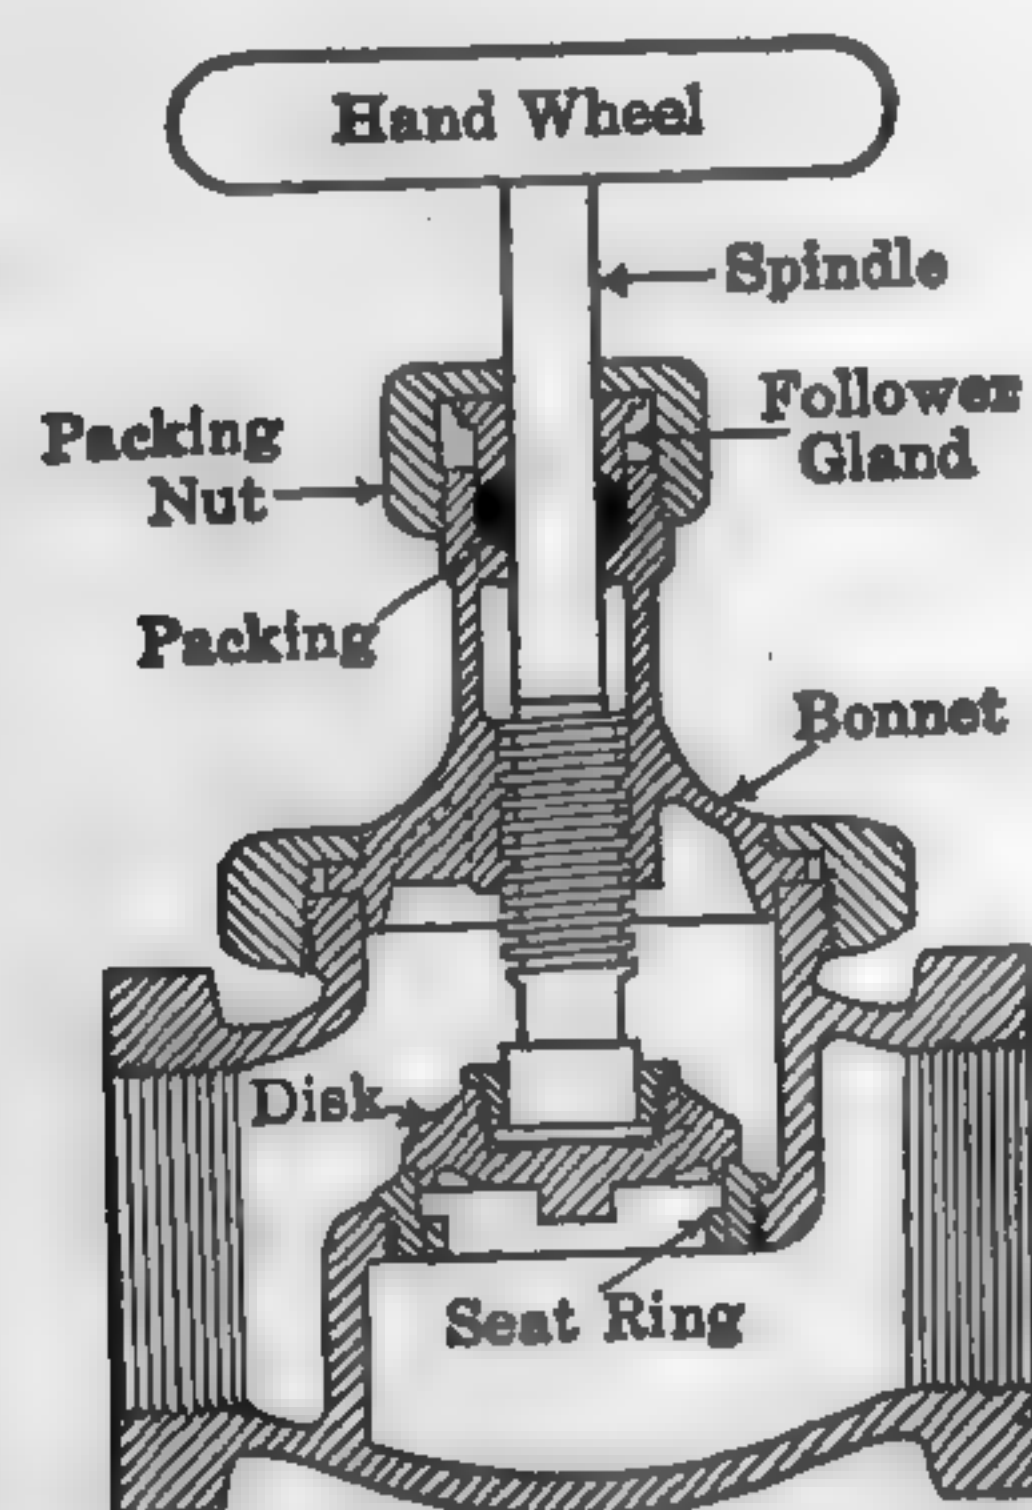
Typical Globe Valve, Screw-top, Inside-screw.
